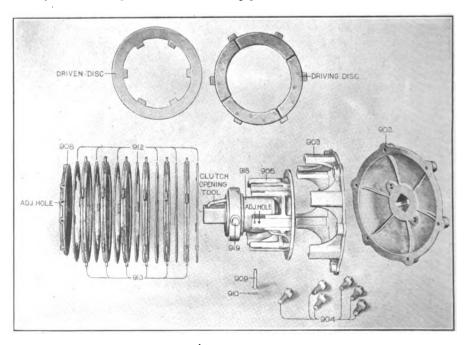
THE CLUTCH DISSEMBLED, SHOWING DISCS AND OTHER PARTS
